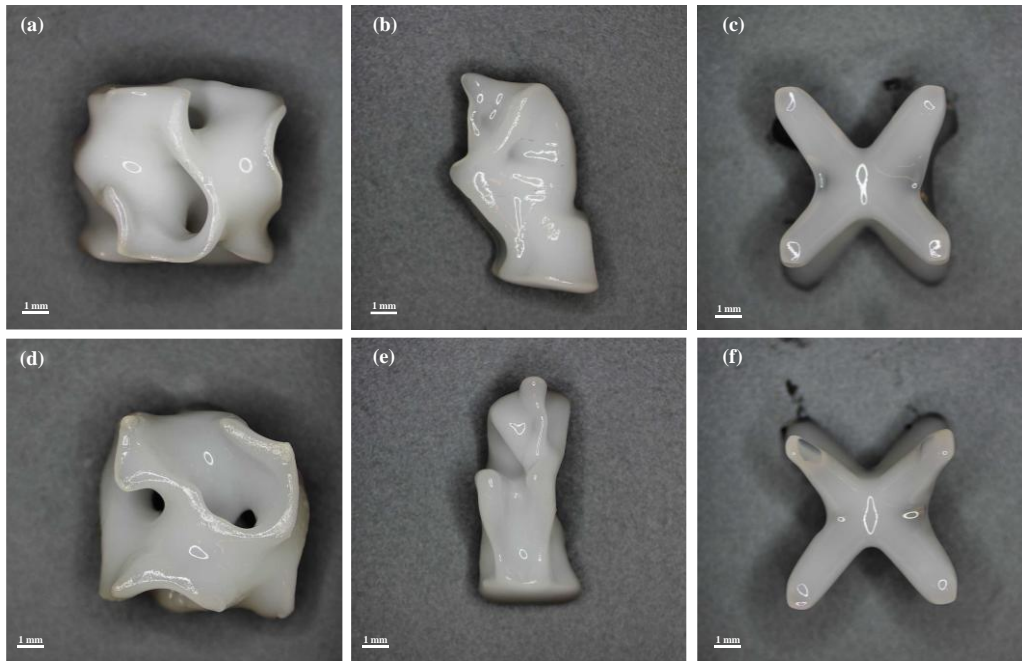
Photographs of the printed complex geometries (TPMS, Thinker, and BCC) from different viewing angles. Scale bars: 1 mm
